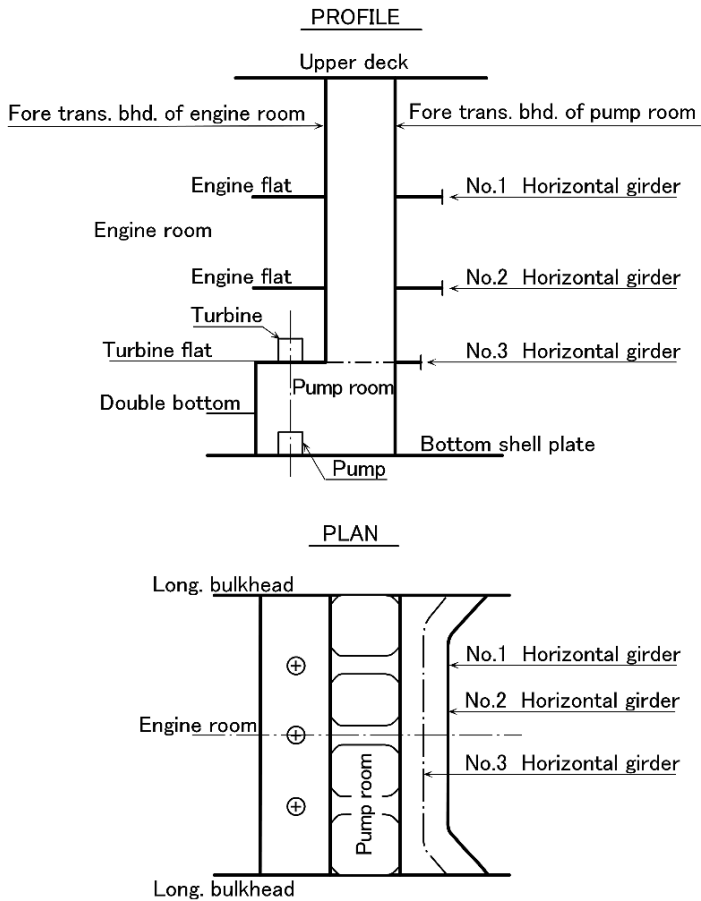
Pump room arrangement of 100,000DWT tanker
